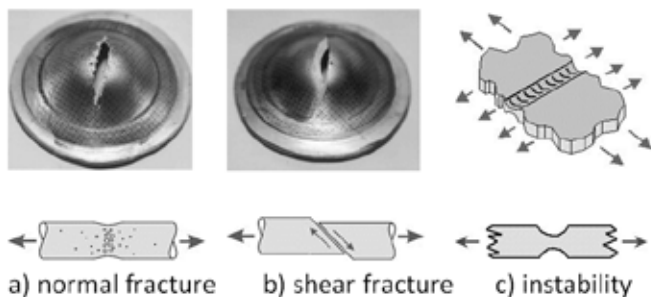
Mechanisms of ductile normal fracture, ductile shear fracture and sheet instability (localized necking)
